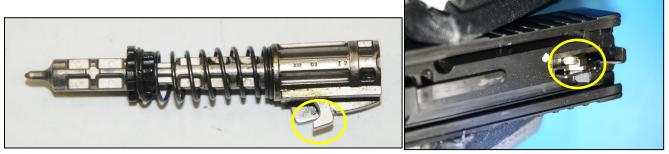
Striker assembly with striker foot circled (left), striker assembly in the slide assembly (right)
